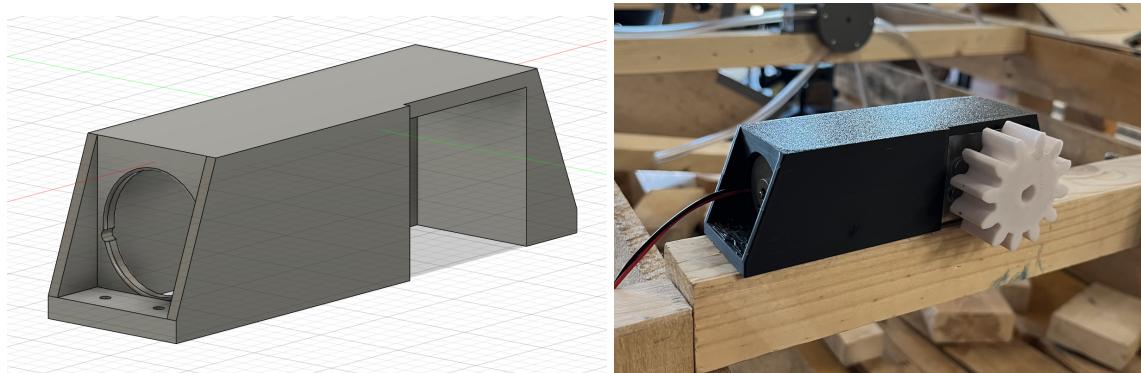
(Left) cad model for newly designed motor box (Right) 3D printed motor box
